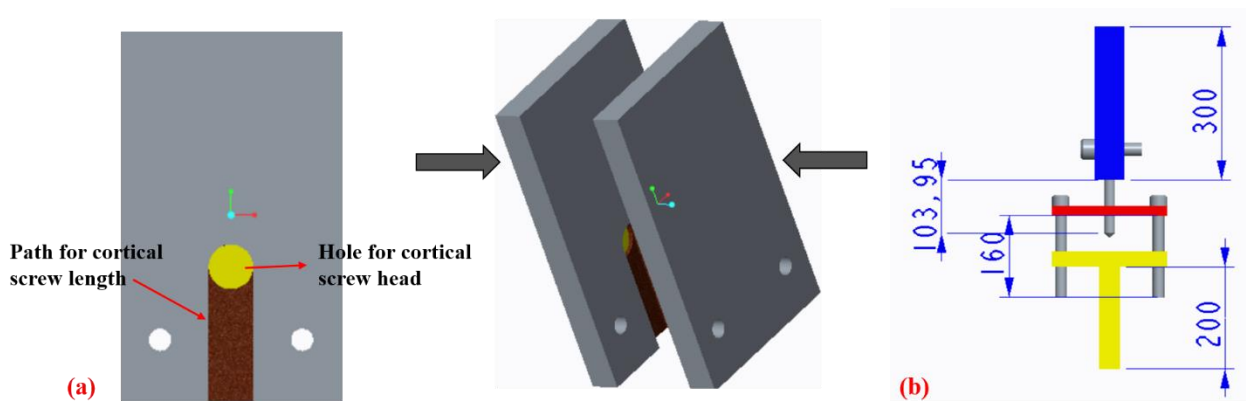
(a) CREO model for upper fixture, (b) CREO model with dimensions for bone screw holding fixture
